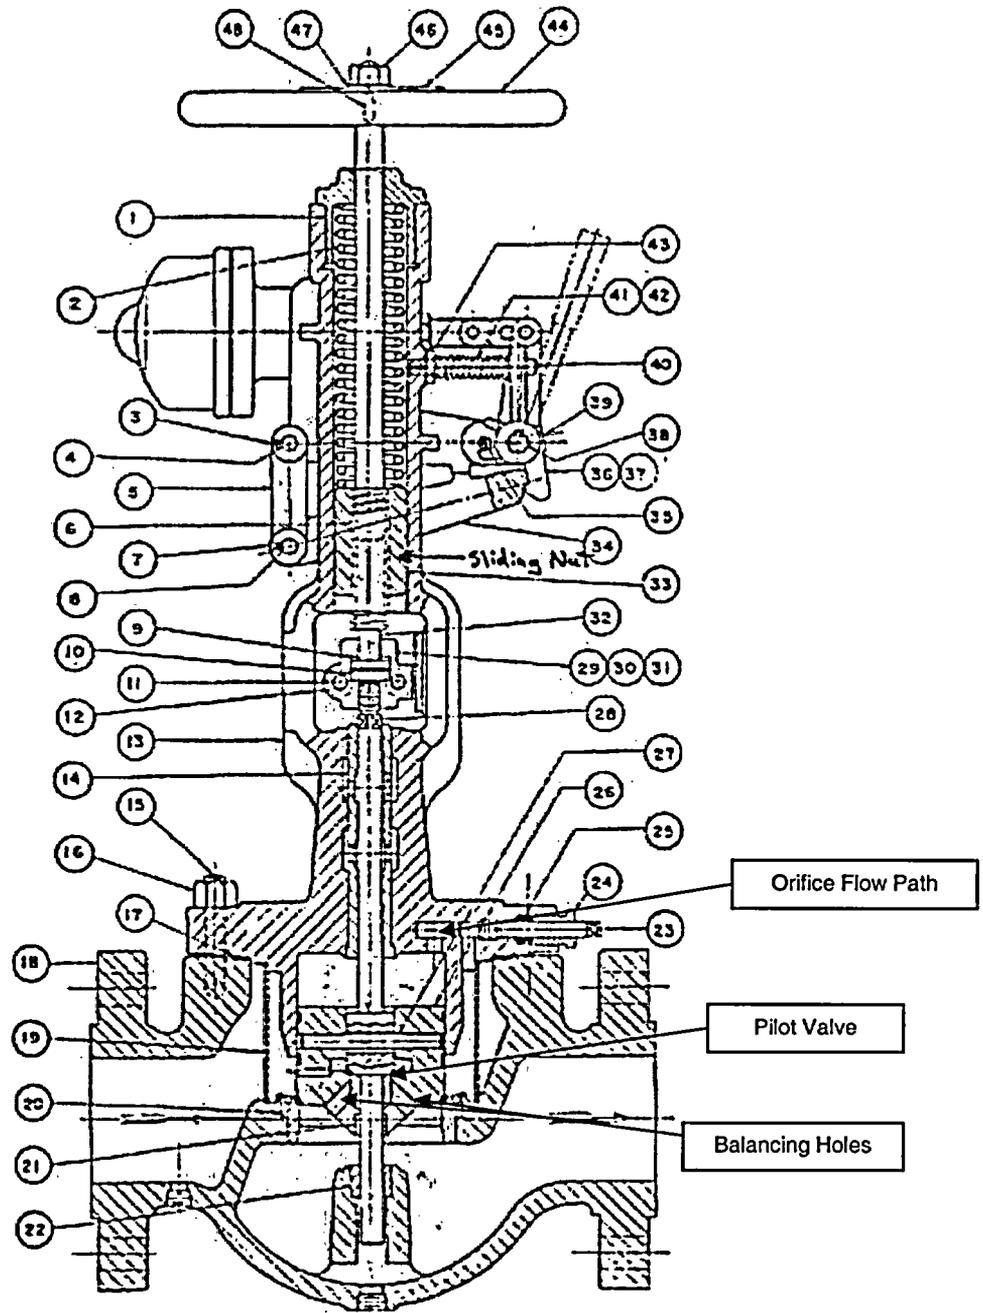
Trip and Throttle Valve used on Terry Turbines (steam flow)
